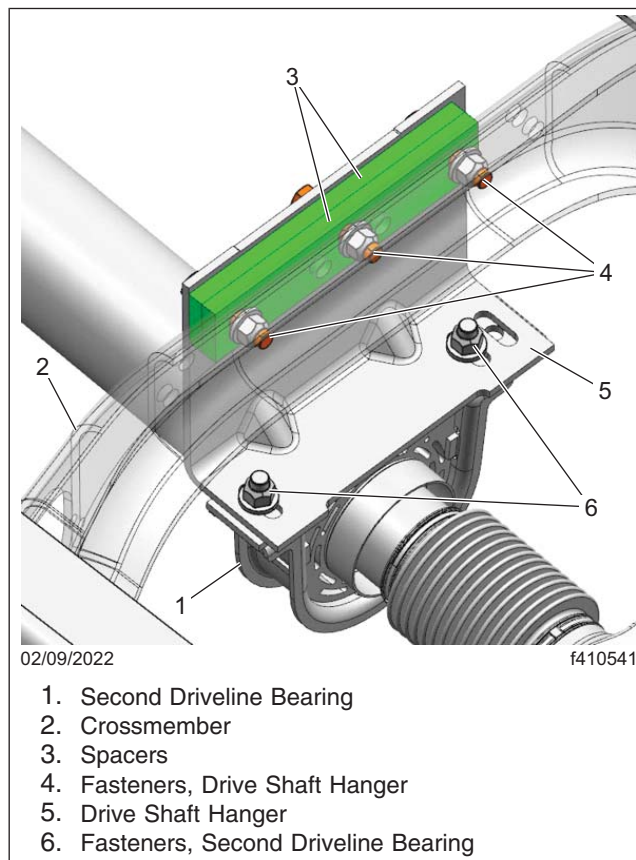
, Second Driveline Bearing Assembly with Spacers Installed
